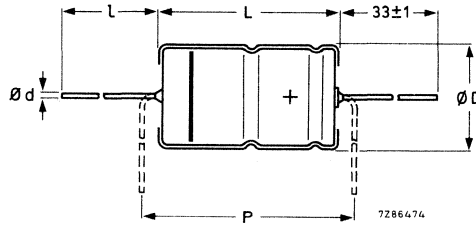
Style 1; see Table 1a for dimensions d, D, L, I and P.
